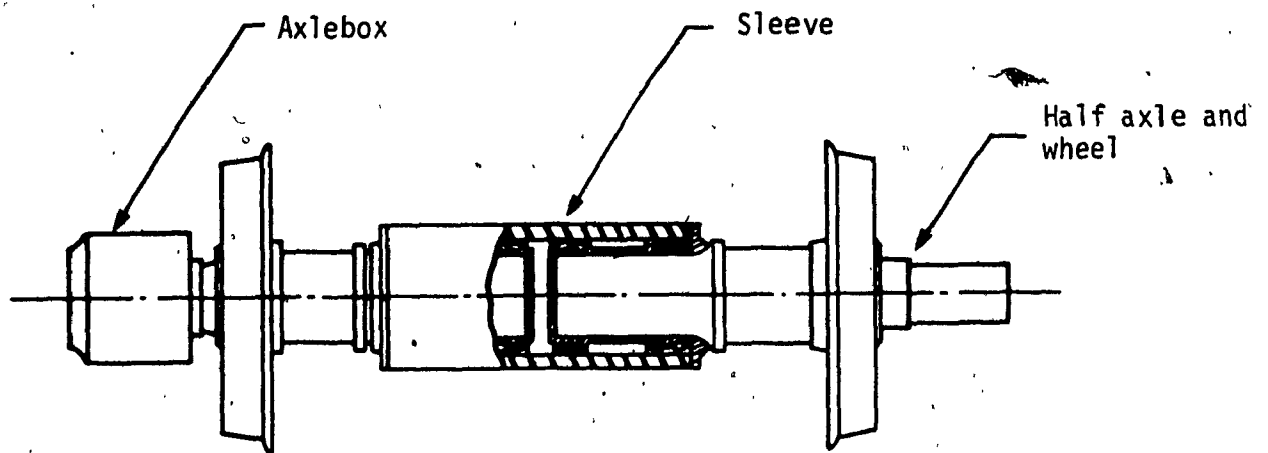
Wheelset assembly for IRW system with two part axle [95].
